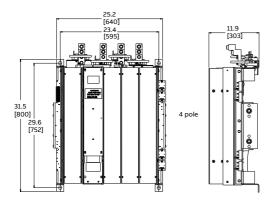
Automatic transfer switch mounting hole dimensions – 63L 4-pole
